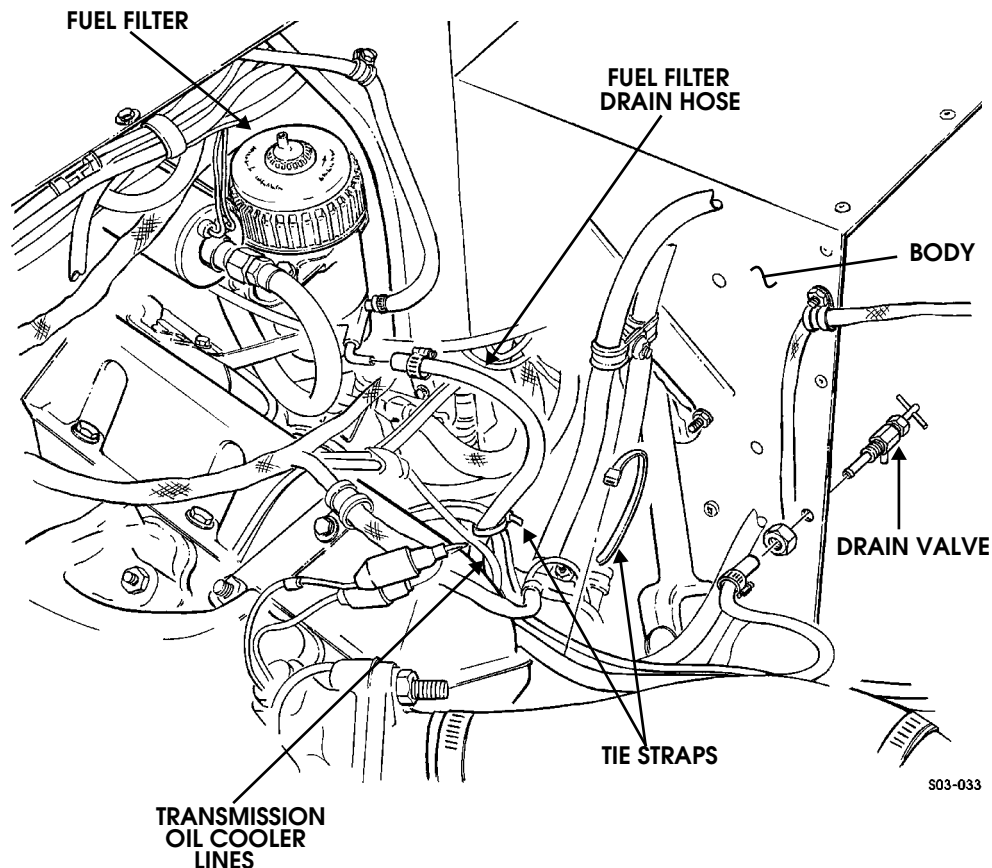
Fuel Filter Drain Hose and Valve Location
